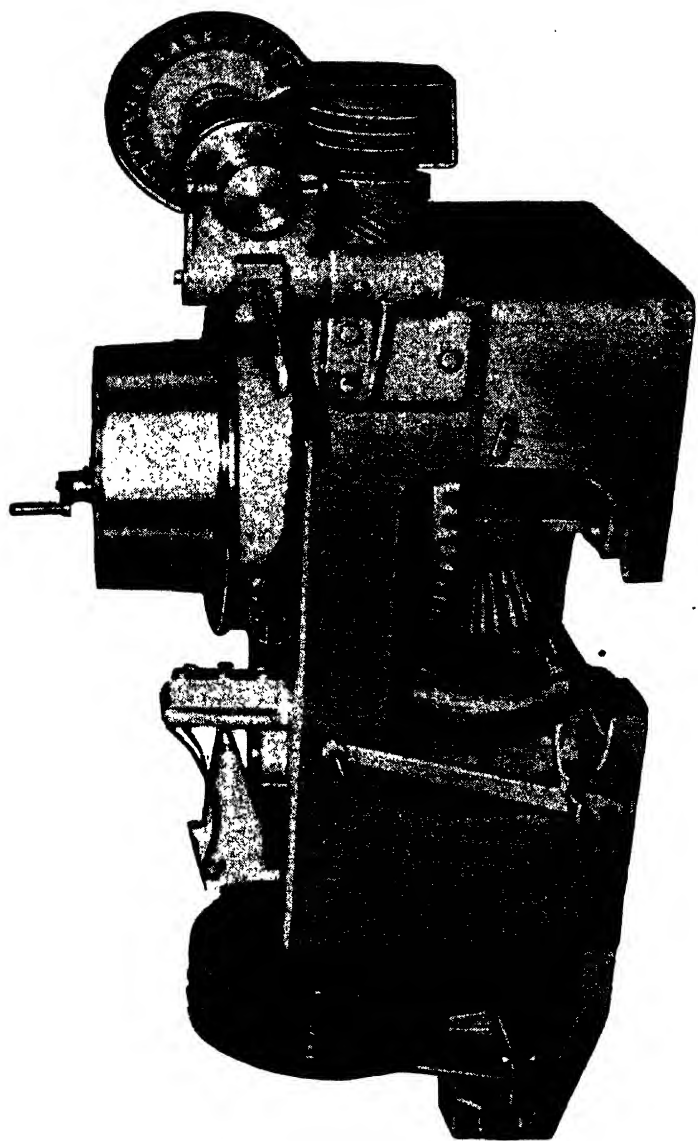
BARCRO (HEAVY DUTY) SINGLE-HOLE MACHINE
